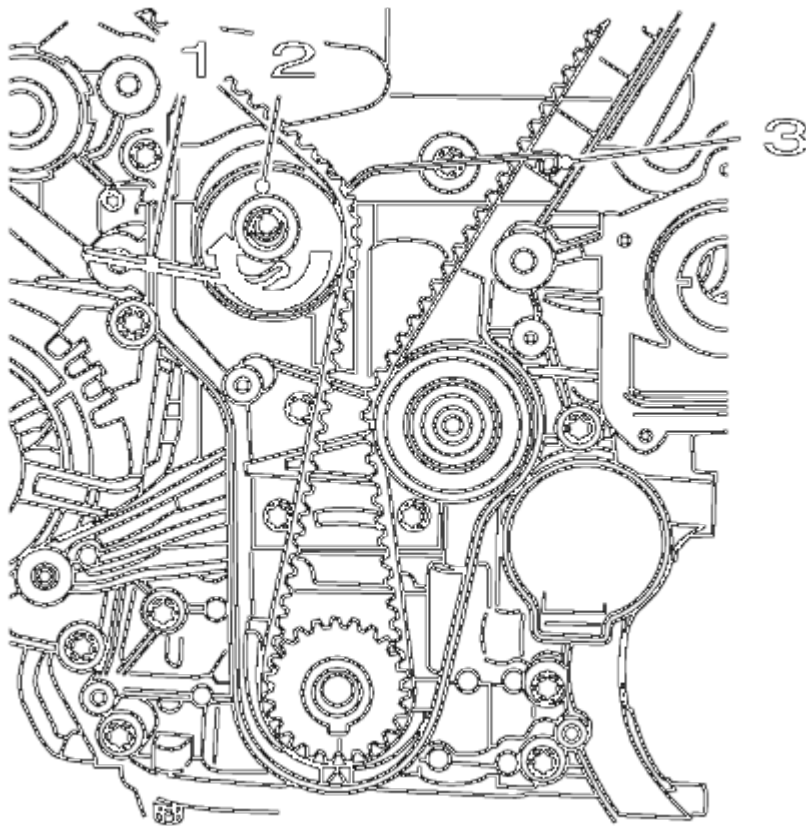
View Of Drive Belt Tensioner, Allen Key And KM-6333
